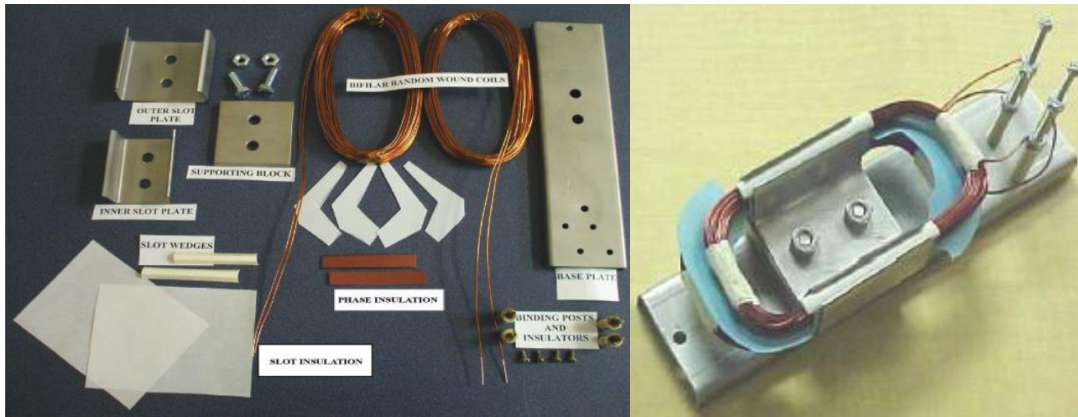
Components of a motorette before final assembly (left) and completely assembled and varnished motorette (right) [102]
